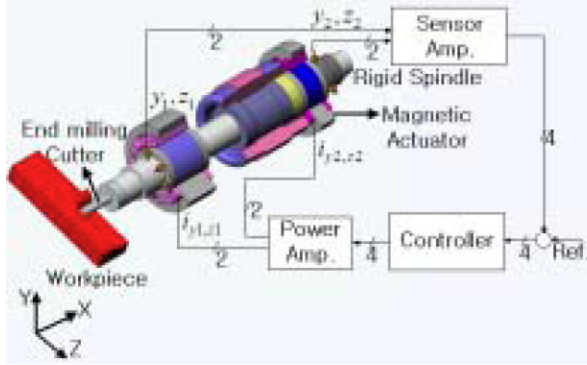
Schematic diagram of a workpiece and an AMB milling spindle
